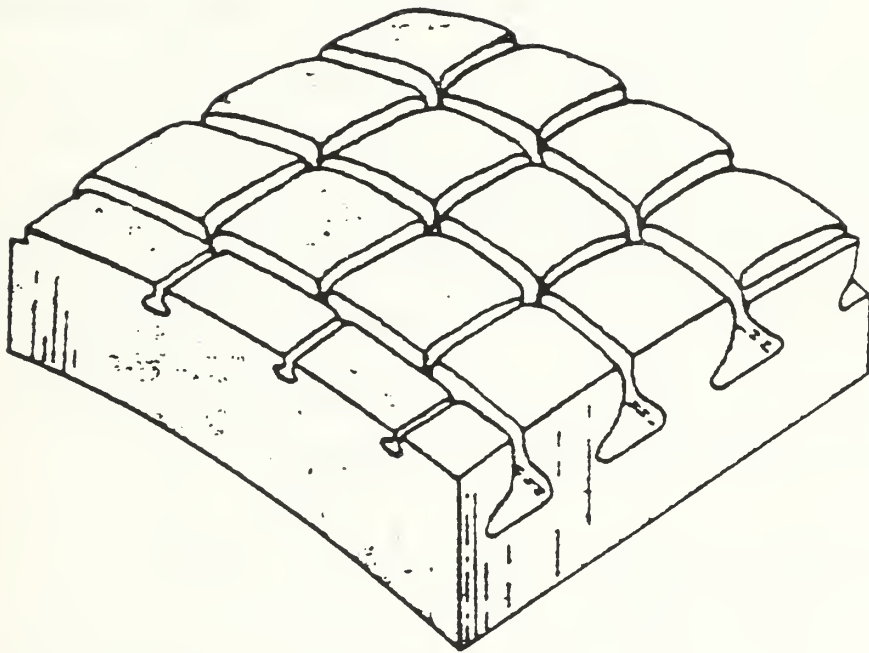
Surface Profile of Enhanced (TURBO-B) Tube
